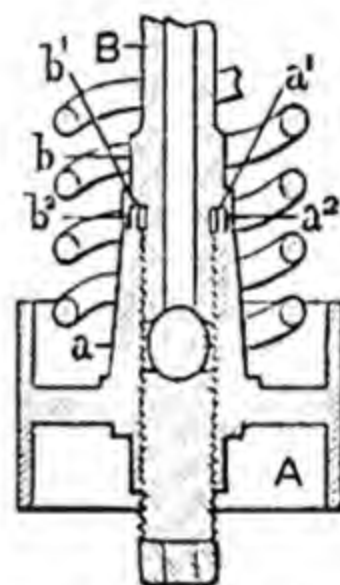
Attachment of the spring to the piston in the Crosby indicator.
